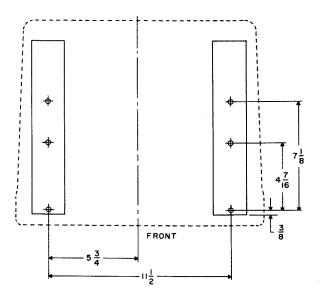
Tactical Case CY-2976/PG, Shock Mounted Installation, Mounting Holes Location
